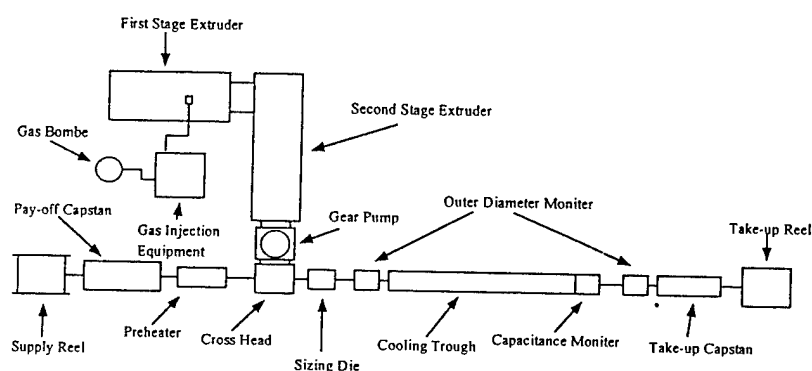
Manufacturing extrusion line for coaxial cable core with highly expanded insulation
